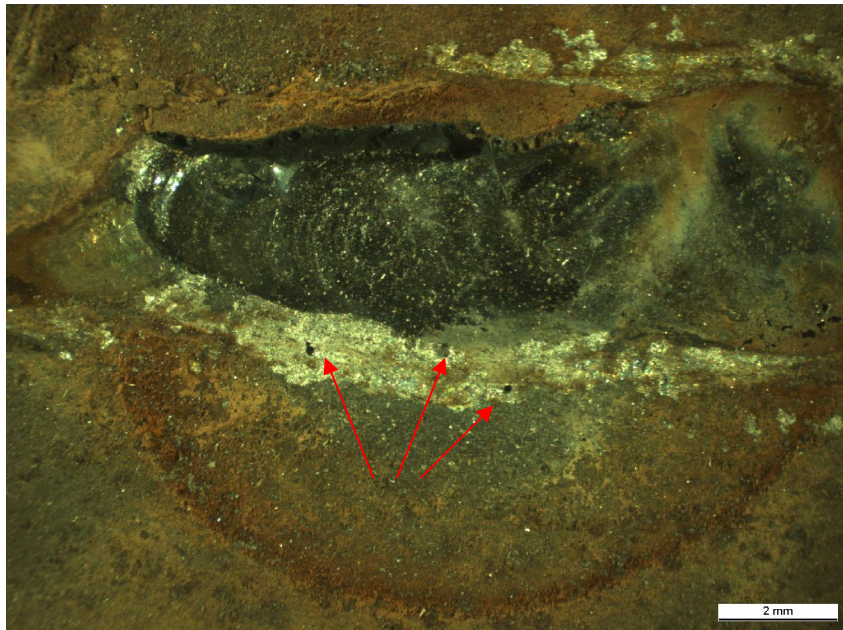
Pits (marked with arrows) on the heat affected zone of a weld on the inner surface of sample 4.
